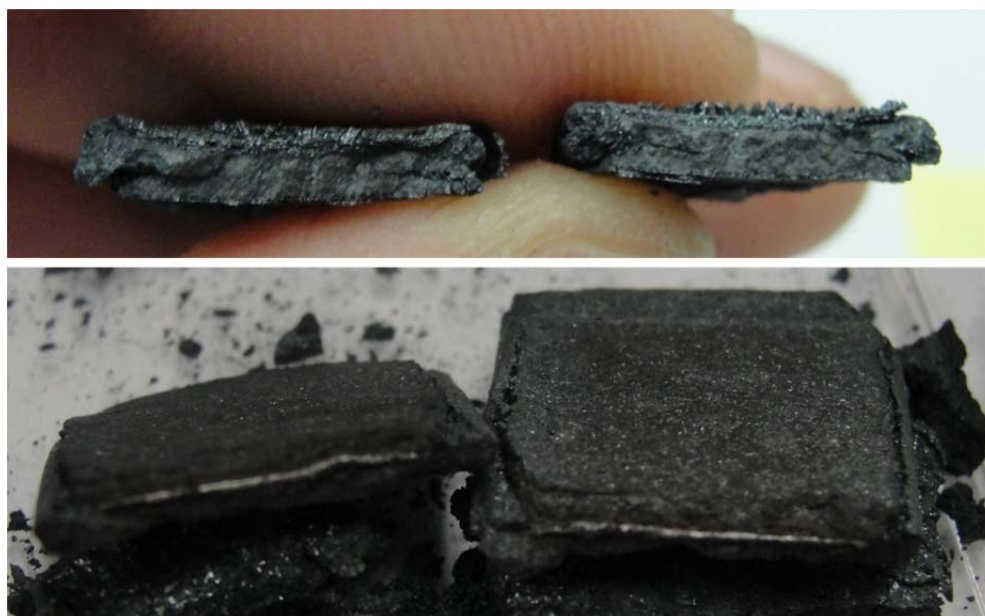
Fractured Samples for Test 6 (top) and Test 7 (bottom)
